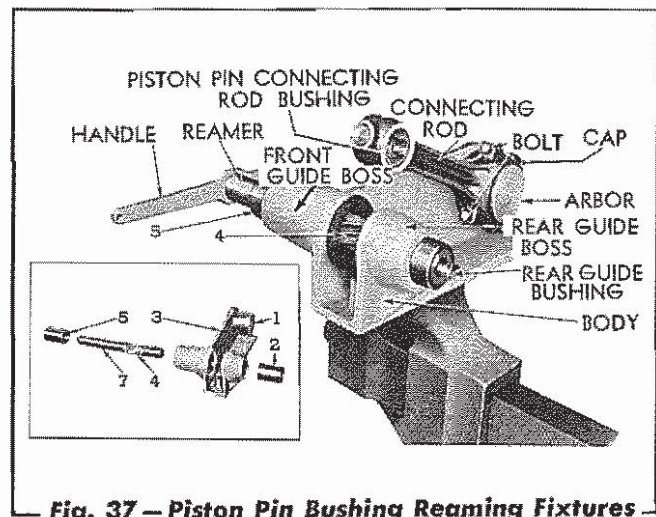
Piston Pin Bushing Reaming Fixtures
